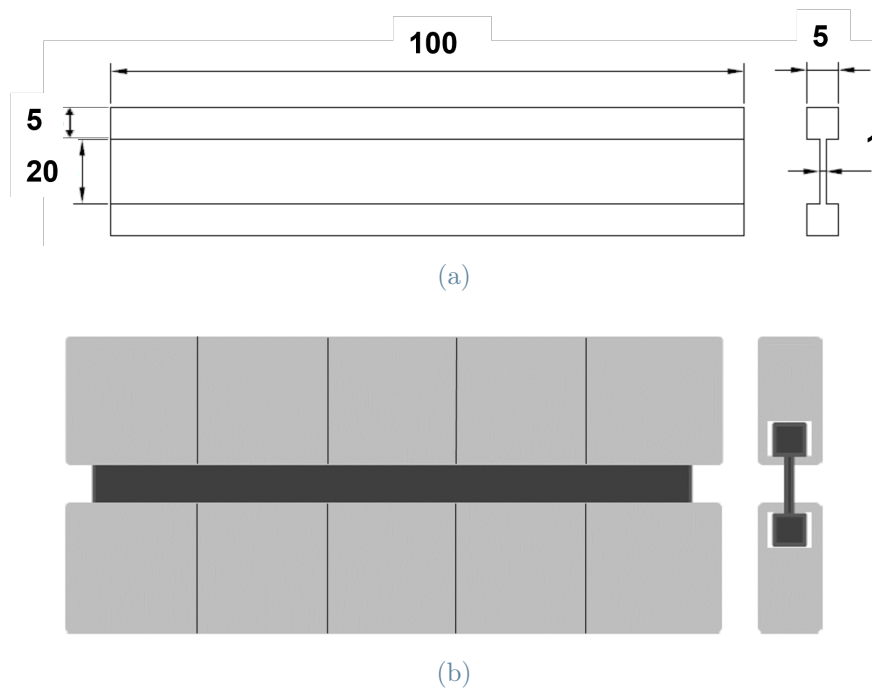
a) Geometry and dimensions of the PS specimen. Dimensions in millimeters. b) Clamping system schematization [50].
